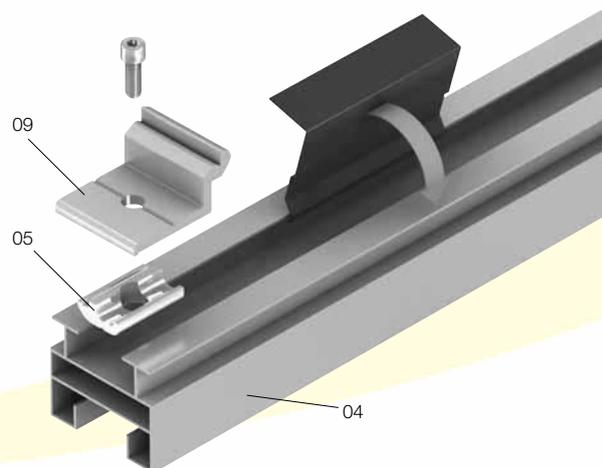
Installing the Anchor Blocks for the Fixing Brackets
